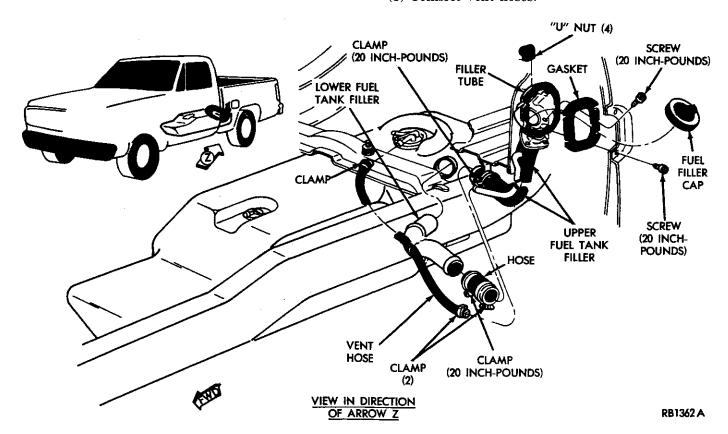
Fuel Filler Neck and Vent Hose Connections—Mid-Frame Mounted Fuel Tanks
